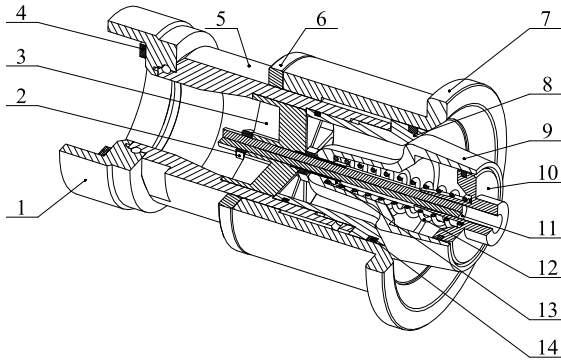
Structure of adaptive gun head. 1. Joint, 2. Nut, 3. Regulator, 4. Gasket, 5. Enclosure, 6. Ring, 7. Outer nozzle, 8. Inner nozzle, 9. Spray core, 10. End cap, 11. Core rod, 12. Spring, 13. Core sleeve, 14. Seal ring.
